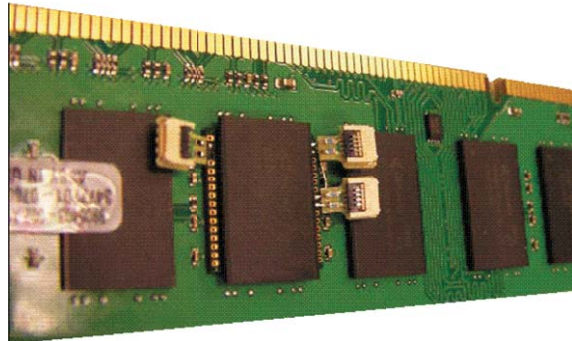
The BGA probe is soldered between the DRAM and the DIMM to provide connection to the oscilloscope ZIF probe heads.
